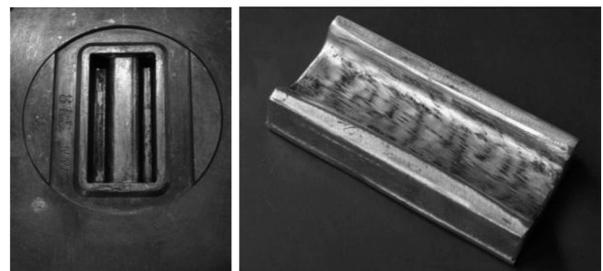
Die insert to forge a flat model shape and flat model shape forged from magnesium alloy
